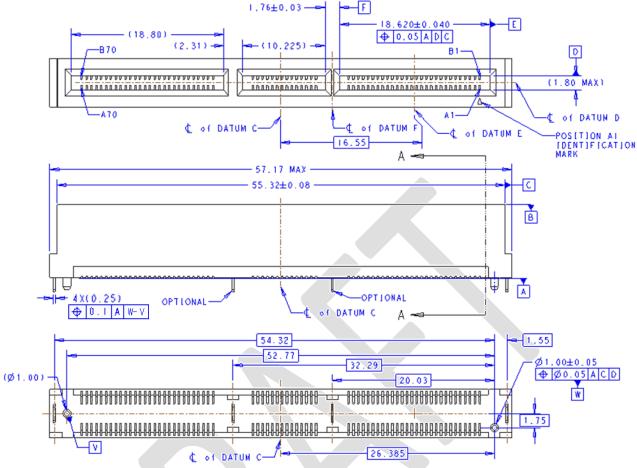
4C STRAIGHT CONNECTOR DIMENSIONS
